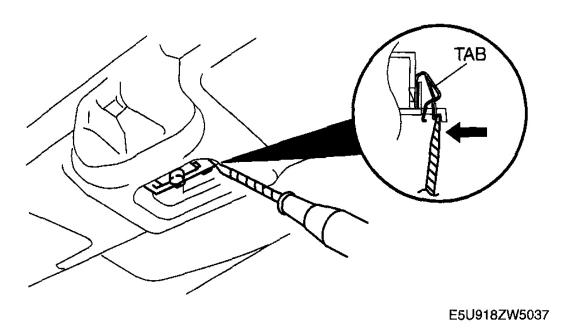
Inserting Tape-Wrapped Flathead Screwdriver Into Gap Between Headliner & Map Light Courtesy of MAZDA MOTORS CORP.
